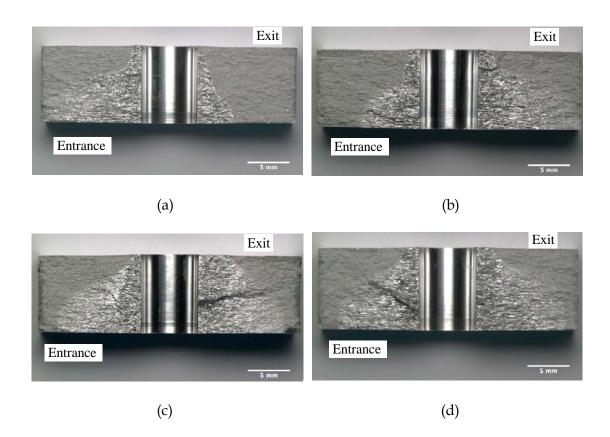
Crack front shapes of the cold expanded open hole specimens for different exposure times at 350°F (177°C): (a) 1 hour; (b) 3 hours; (c) 6 hours and (d) 8 hours. Cracking in the cold expanded open hole specimens generally initiated at or near the hole corner on the mandrel entrance side of the specimen.
